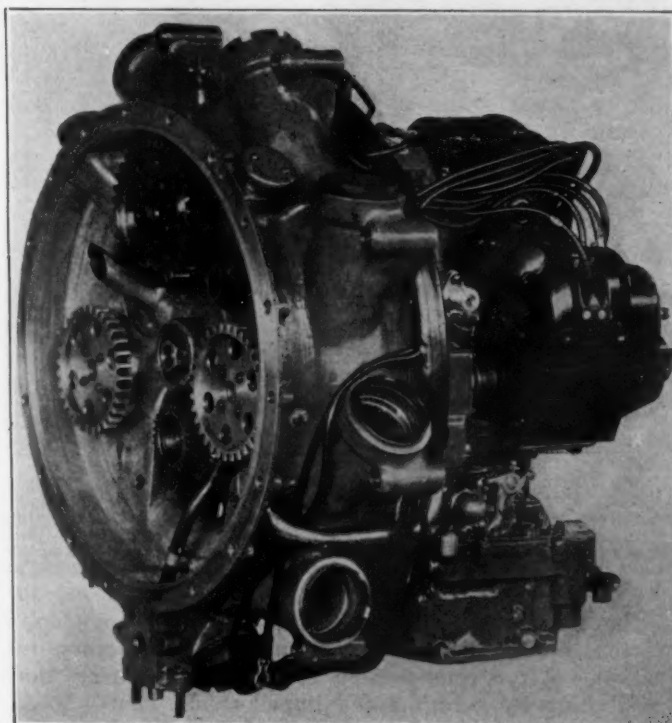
ACCESSORY ASSEMBLY OF WASP ENGINE
